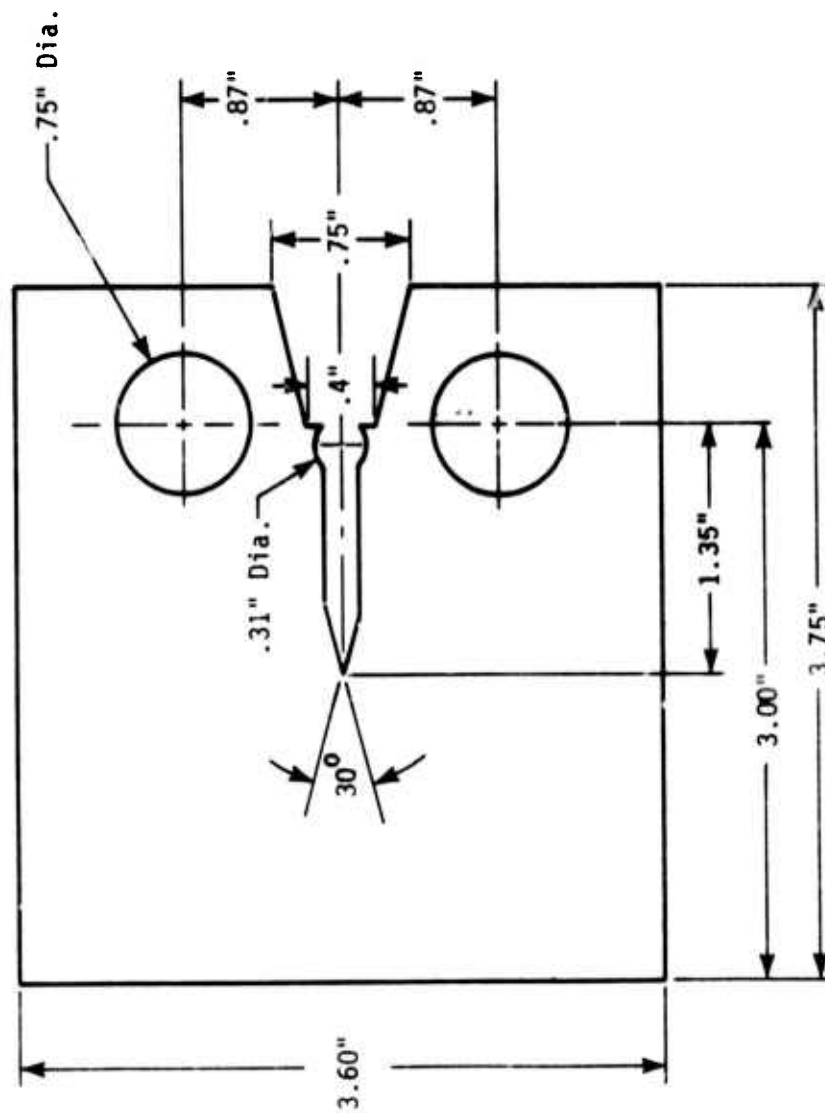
Compact tensile specimen used for J-integral tests
